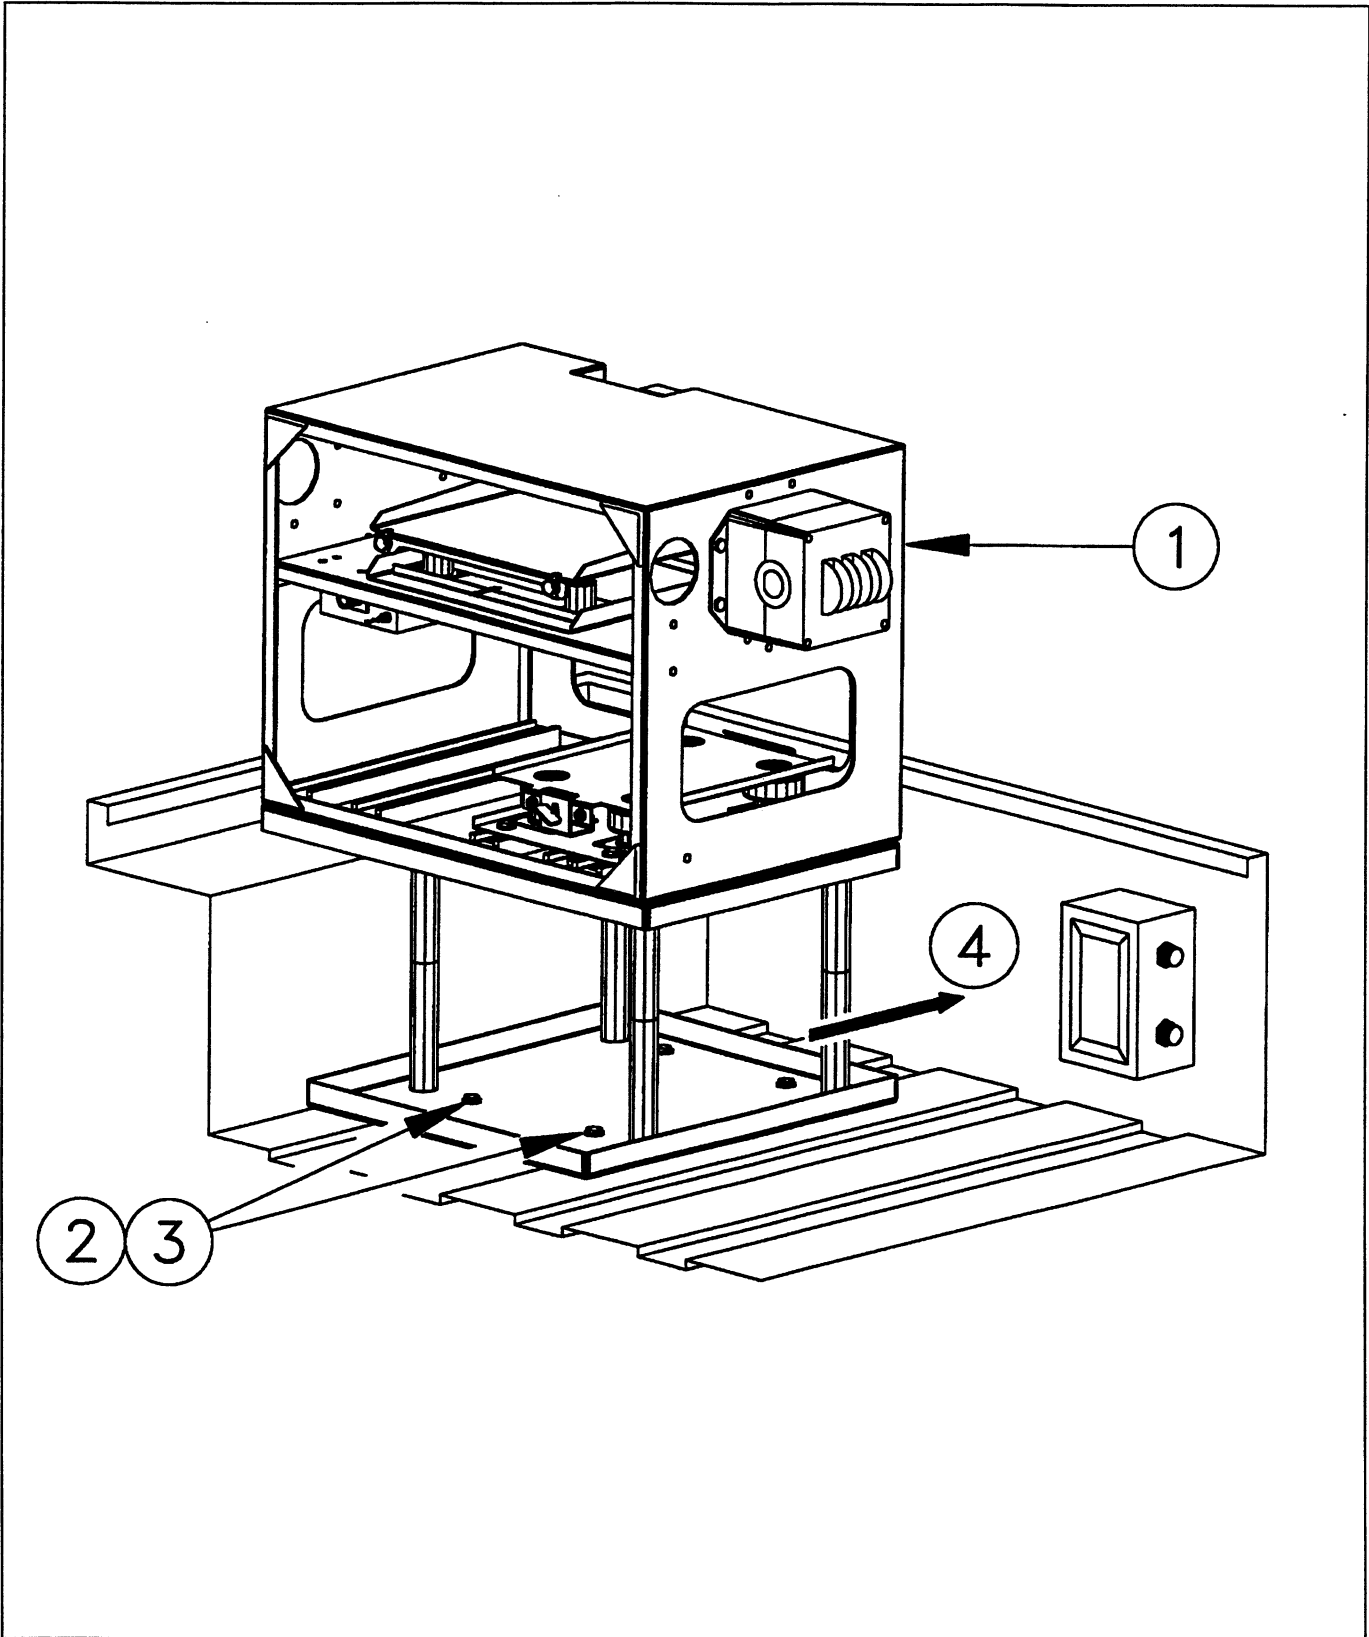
(Sheet 1 of 2) Base, Assembly, Mounting Installation
